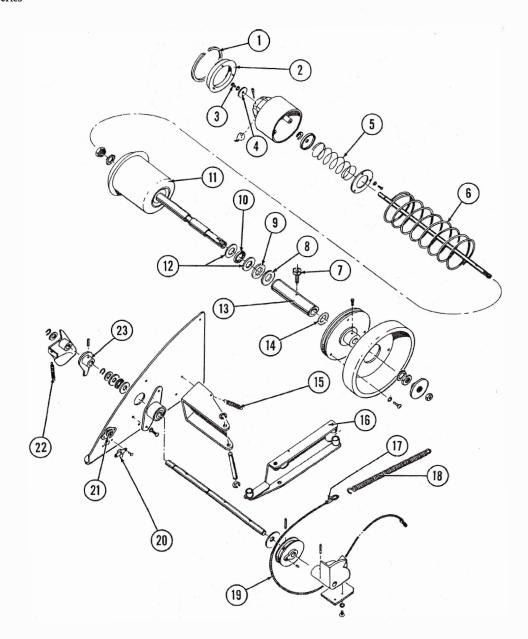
TURNTABLE SHAFT ASSEMBLY, RECORD CLAMP SHAFT, AND MOUNTING PLATE AND BALL BEARING ASSEMBLY
